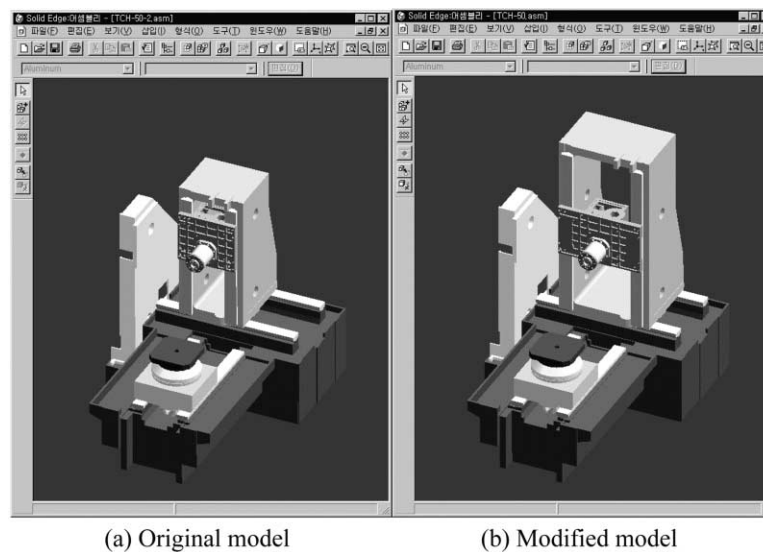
Parametric modeling of the column unit and the spindle unit of horizontal machining center.
